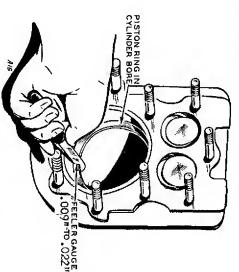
FITTING PISTON RINGS TO THE CYLINDER
